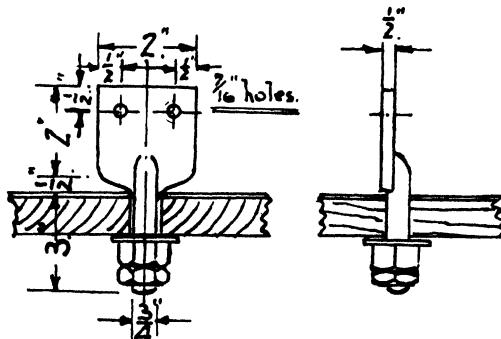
DETAIL OF RUNNERS FOR MOULD BOX
